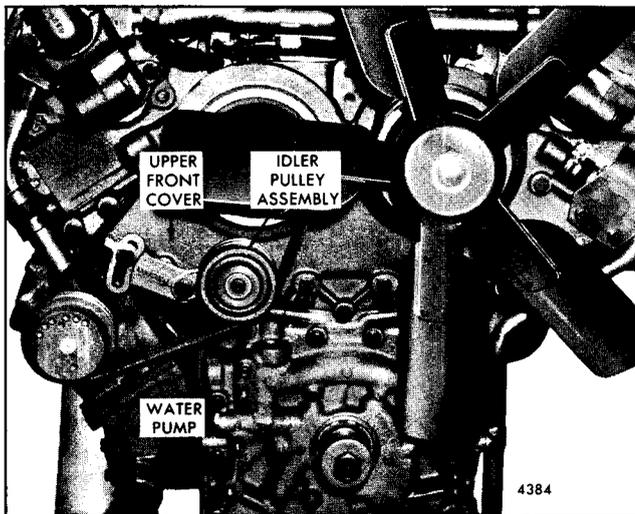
Typical Fresh Water Pump Idler Pulley Mounting
